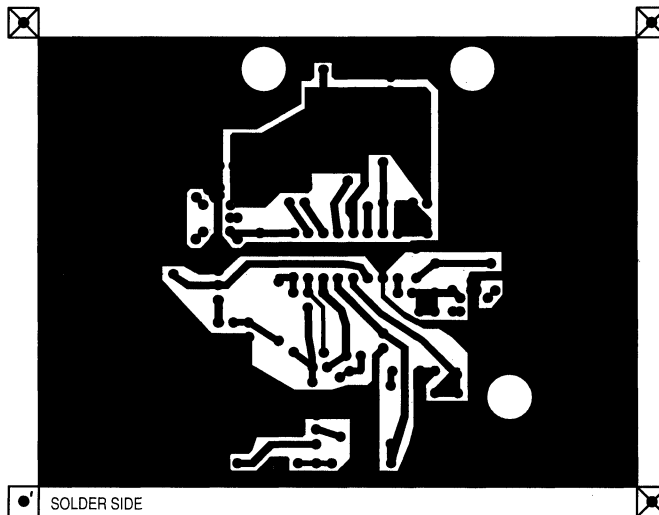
MC3371 PC Board Circuit or Solder Side as Viewed thru Component Side
